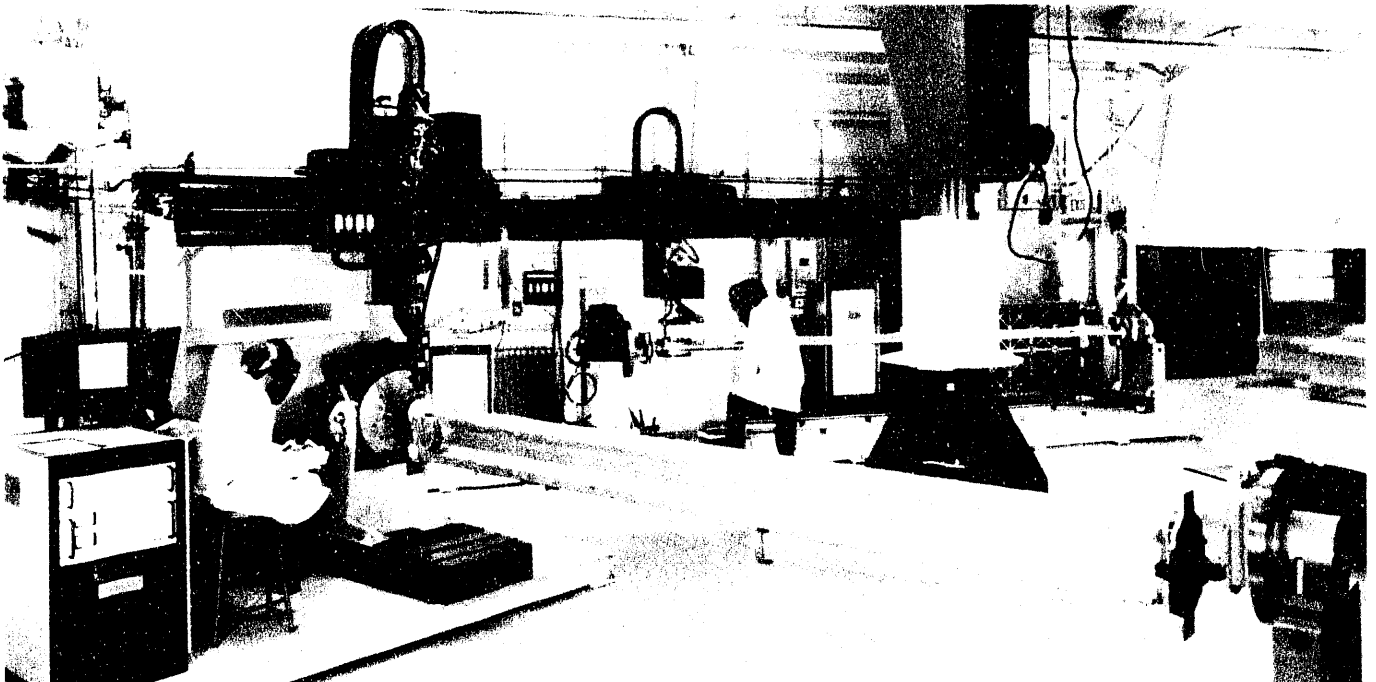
Acuweld CNC-controlled chamber welding stations.
